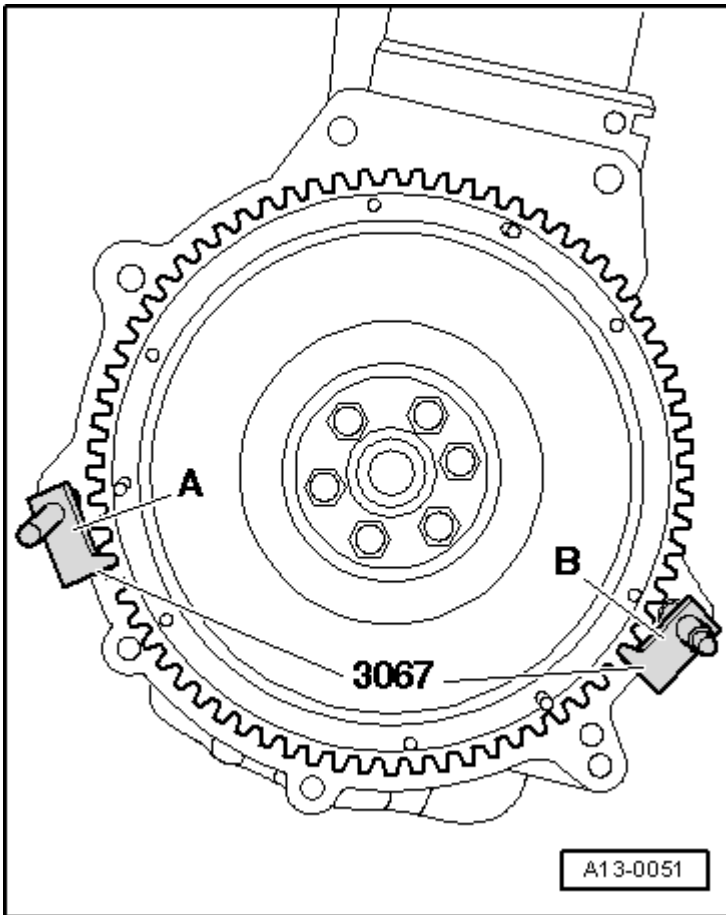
Identifying Retainer -3067- Inserted In Hole On Cylinder Block
